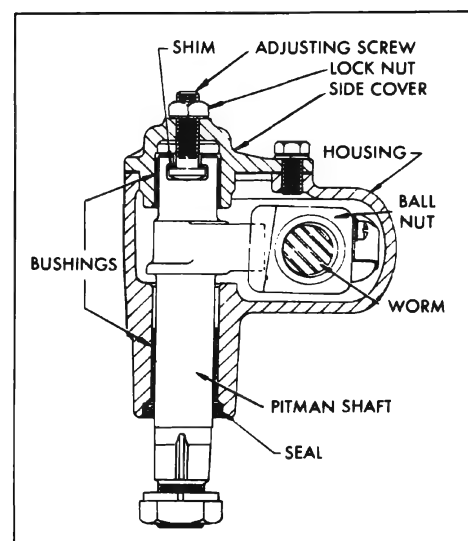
Steering Gear Pitman Shaft and Ball Nut
